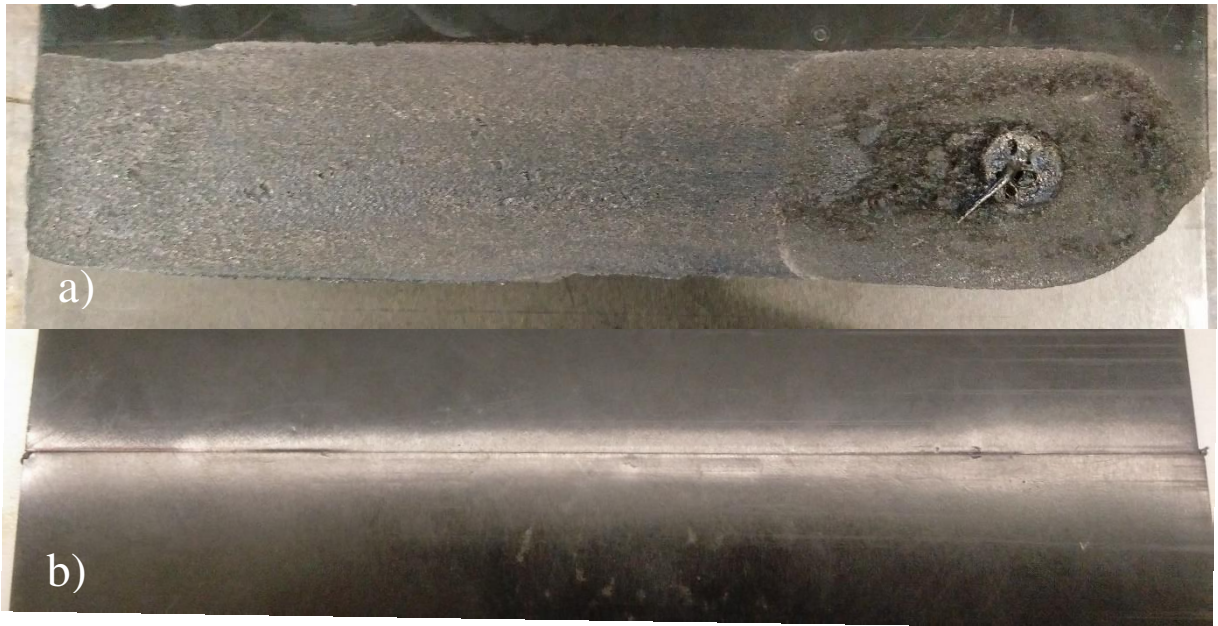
Weld from hybrid tool preheated to 269 °C, a) top view, b) bottom view.
